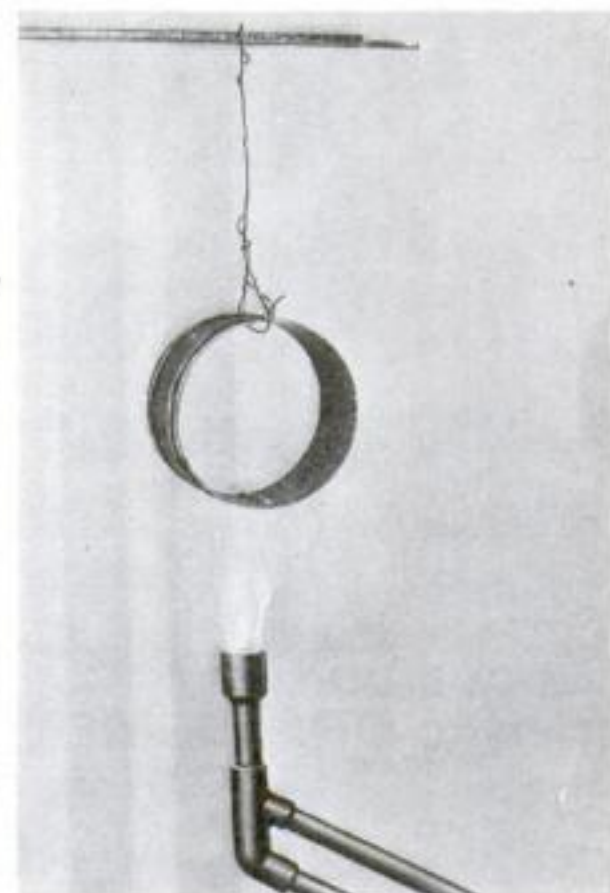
Soldering the butt joint in body of box. Note the binding wire holding the joint.
